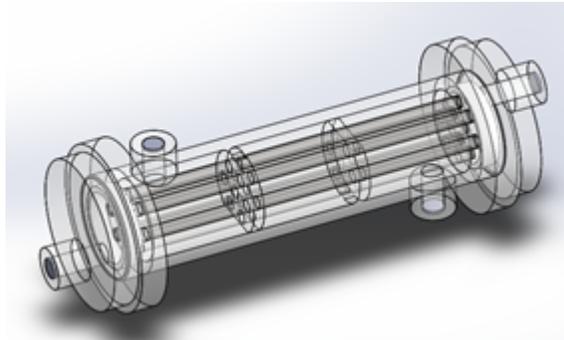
Three-dimensional design of the Shell and Tube Exchanger
